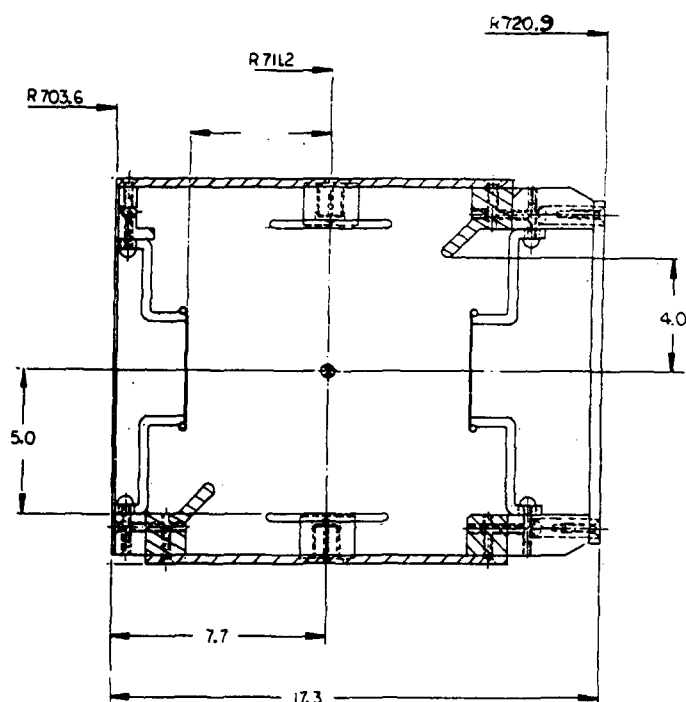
Cross section through the vacuum chamber showing the cage assembly, quadrupole electrodes, and insulators.
